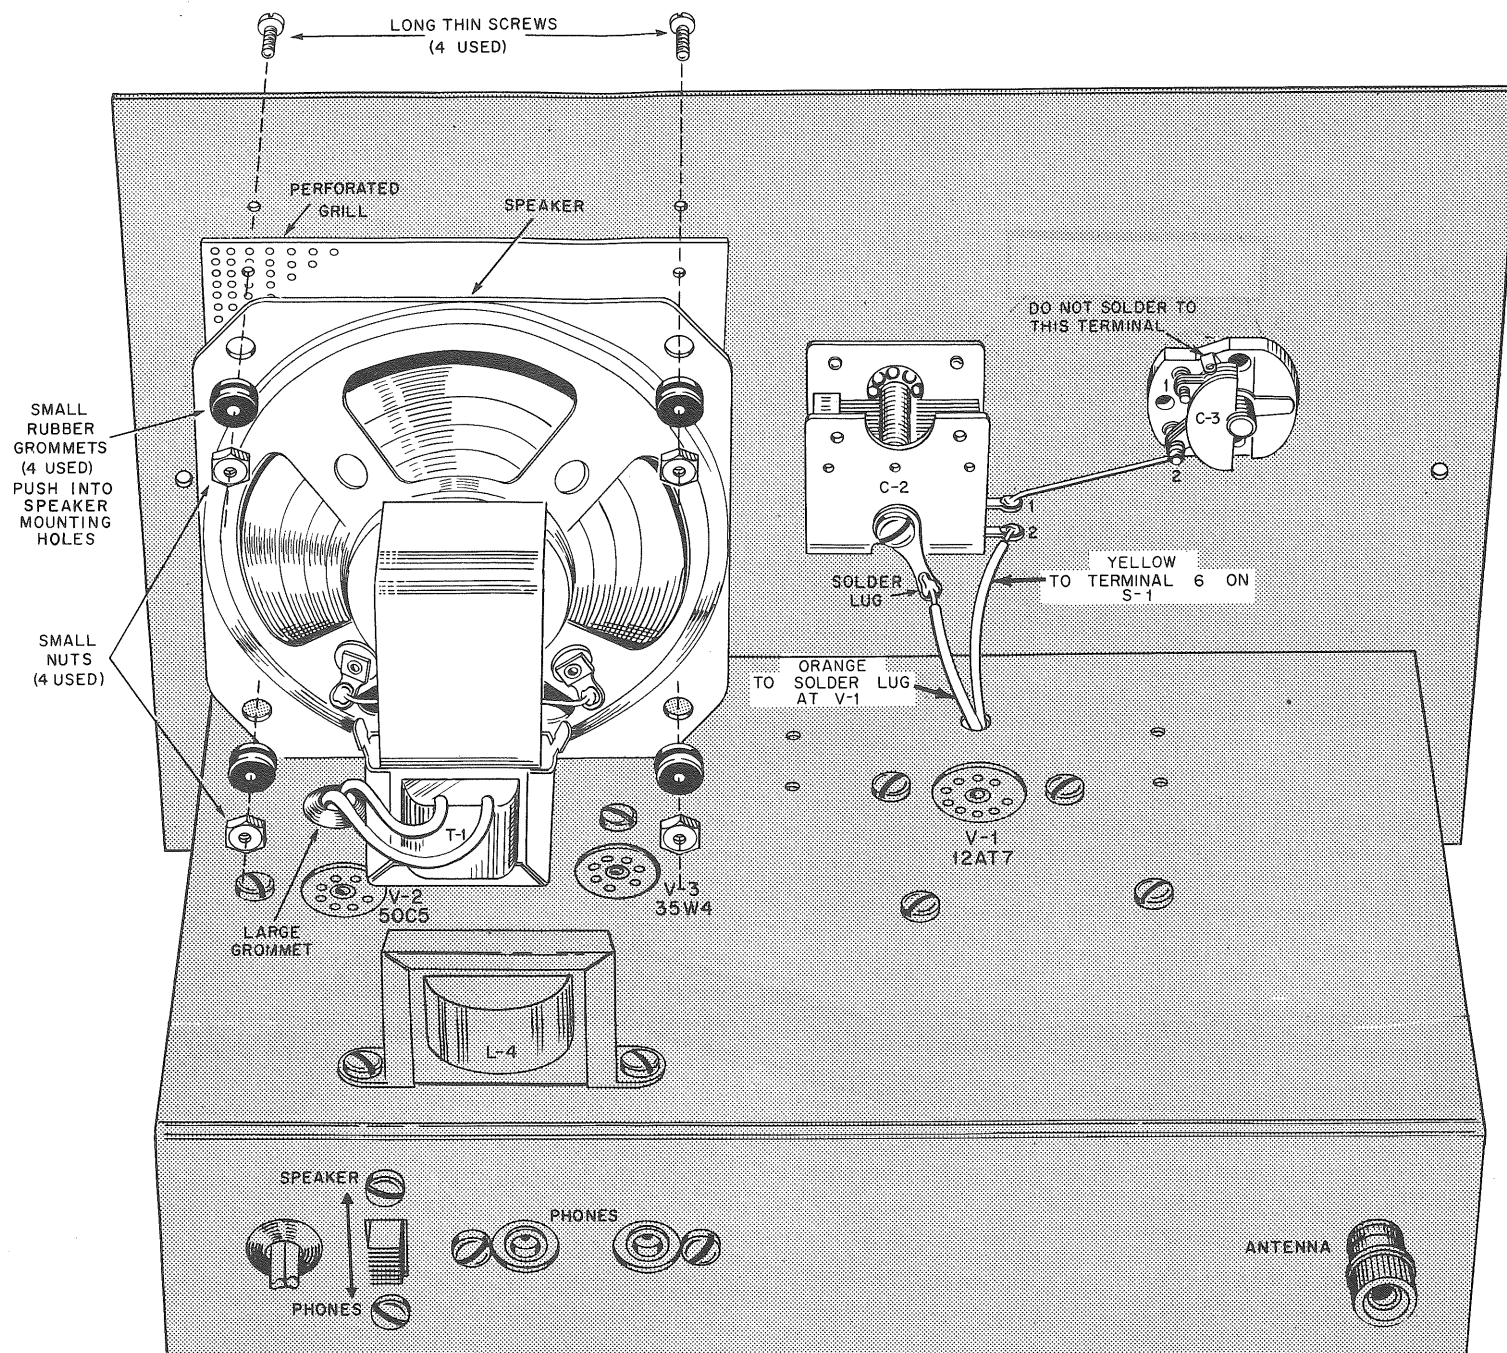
HOW TO MOUNT THE PARTS ON THE FRONT PANEL
